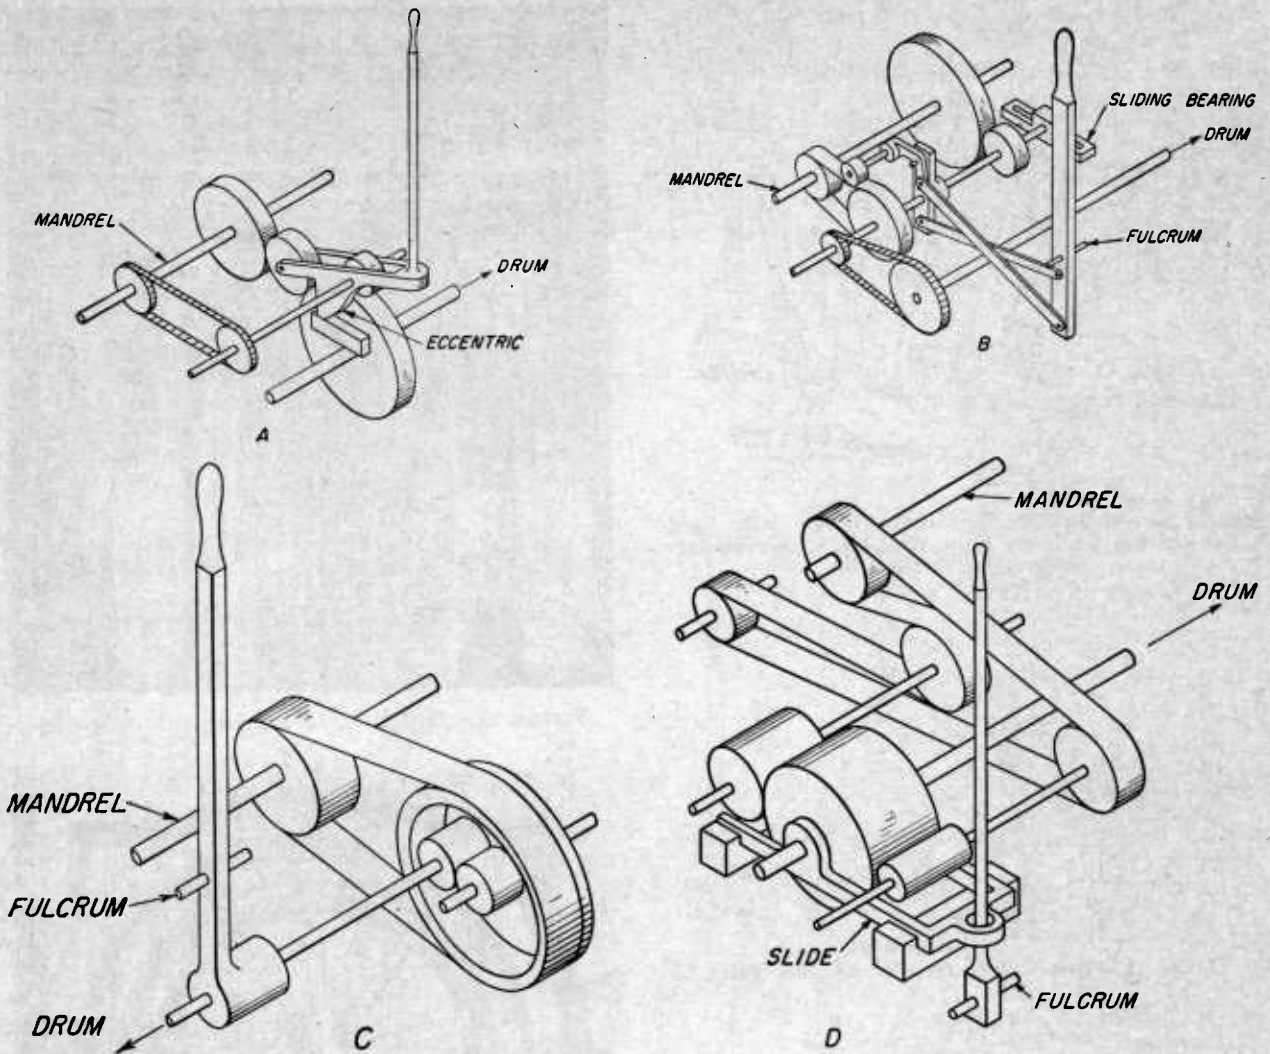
Friction-belt-pulley feed works. A, Eccentric rocker lifts one friction wheel free when the other is brought in contact with friction wheel in drum shaft to reverse action. B, Belted mandrel pulley reverses drum shaft from direction caused by large friction pulley. C, Drum reversed by shifting rider pulley with lever from hub to rim of belt-driven drum pulley. D, Lever-controlled bull wheel reverses drum shaft as it engages one or the other of belt-driven pulleys, which turn in opposite directions.
